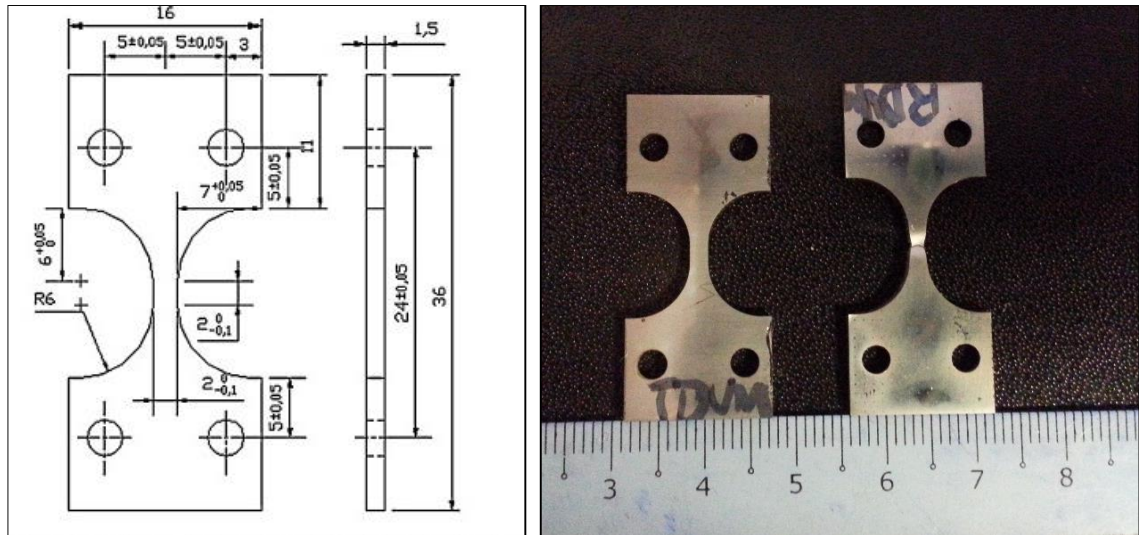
(Left) Mini tensile specimen geometry with gauge width of 2mm by Ghadbeigi et al. 2010. Dimensions are in millimetres, (Right) A picture showing polished and etched micro tensile specimen before and after testing.
